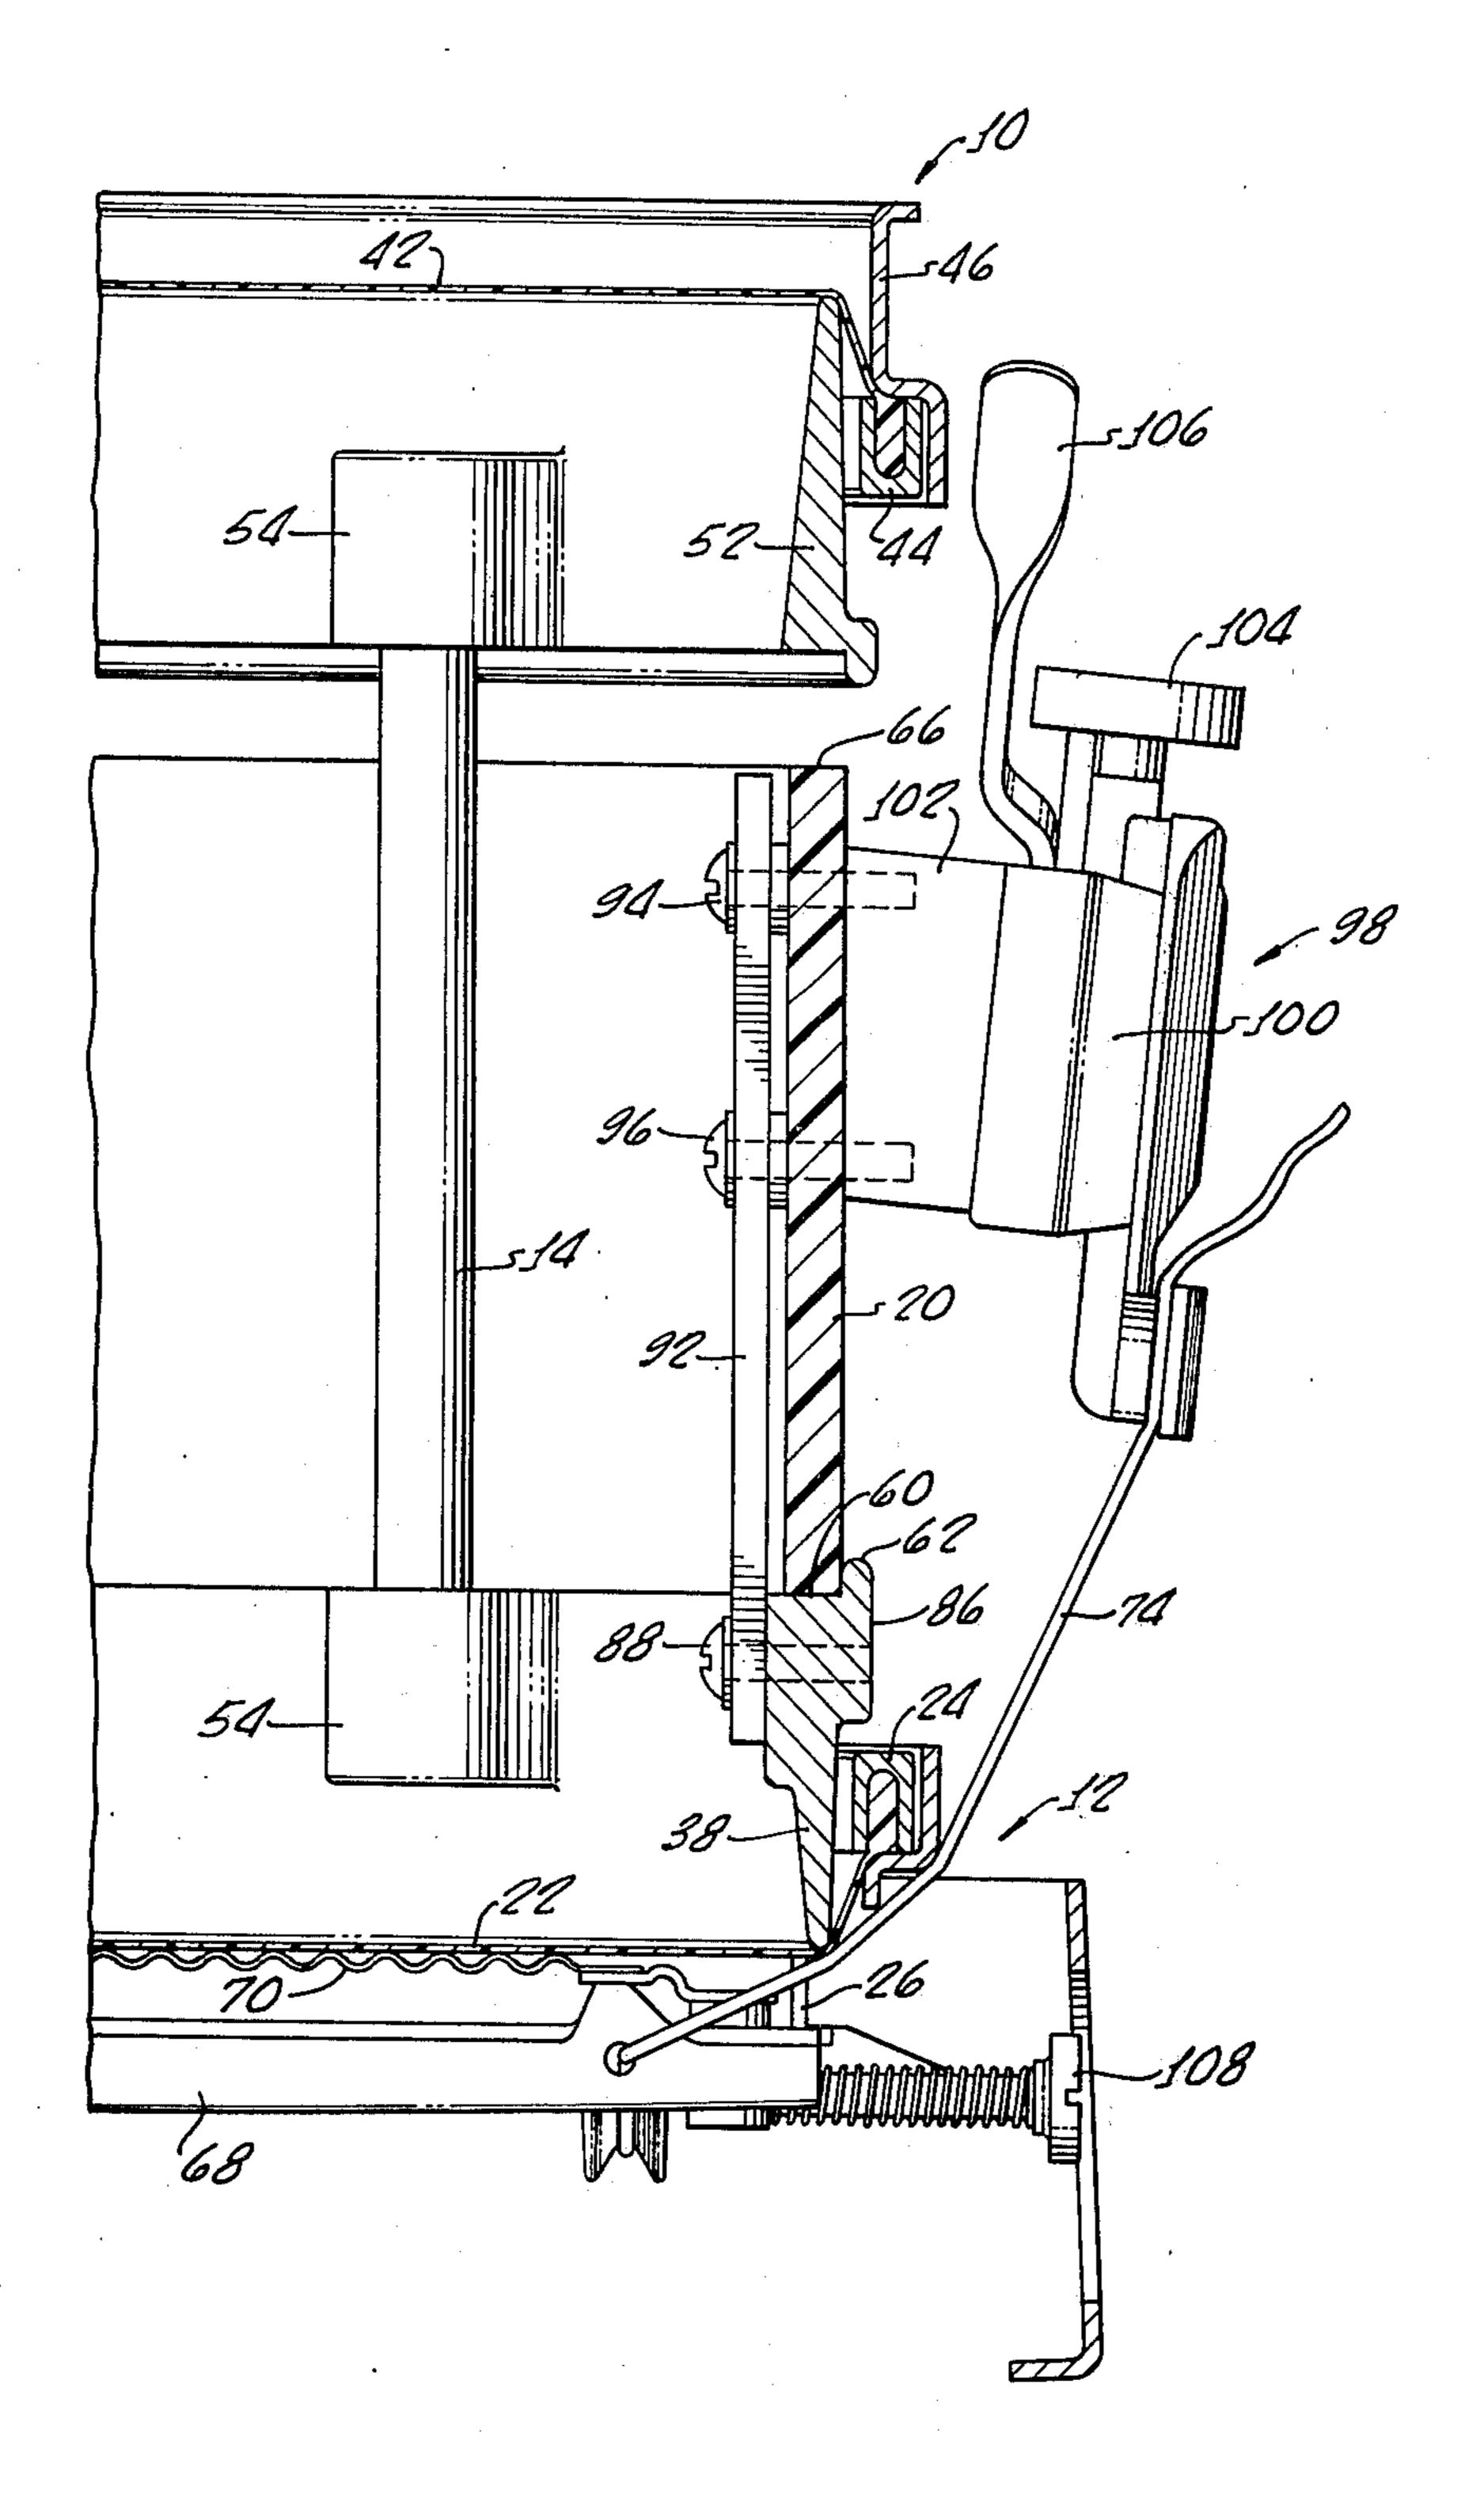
is a fragmentary sectional view showing mounting of a support rod; and
